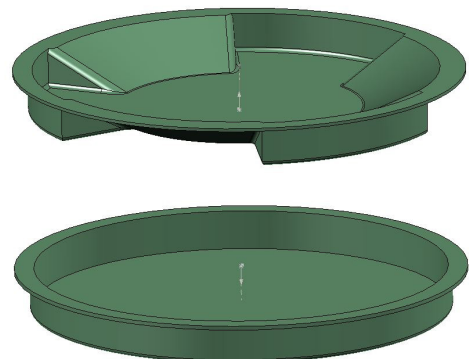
Exploded view of the lid. The upper half is formed by the upper mold. The lower half by the lower mould. The two are joined together.
